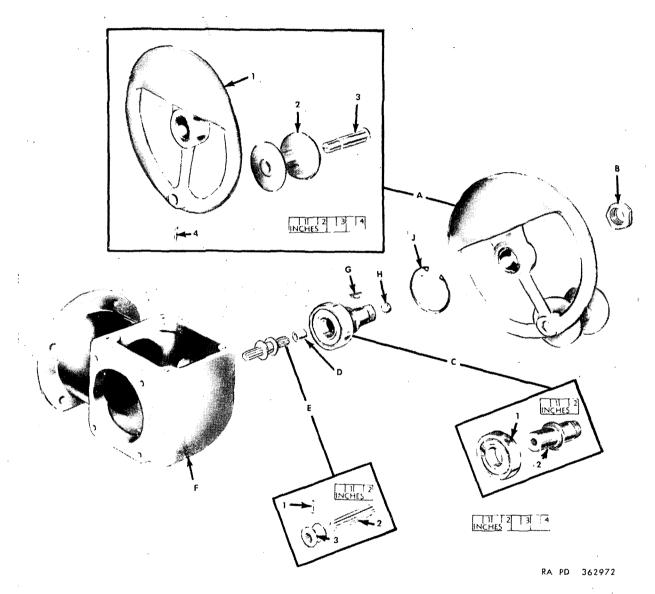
Mount M85-hand elevating mechanism manual drive gear.
